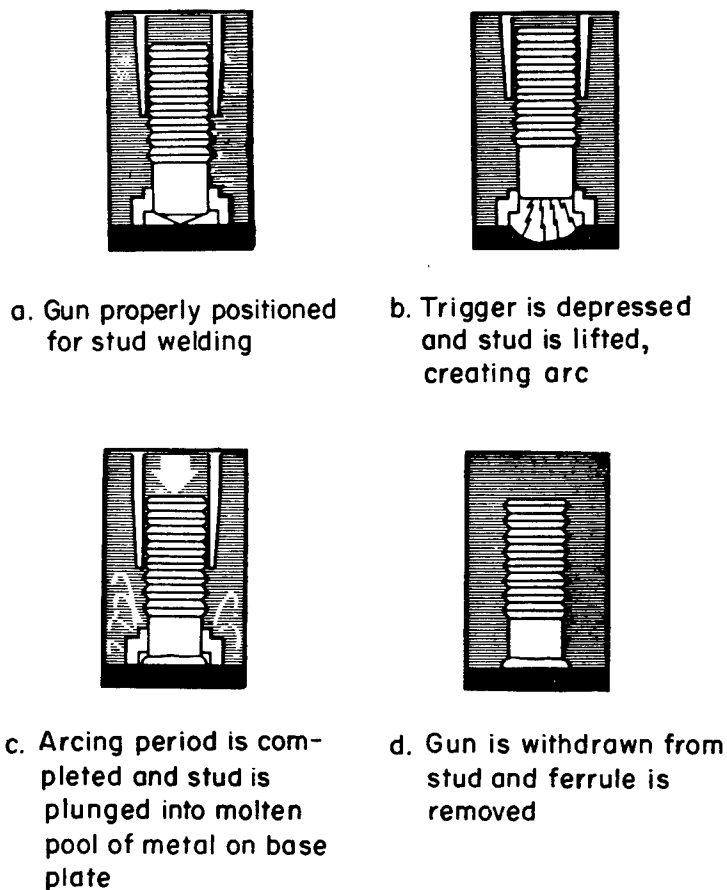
AUTOMATIC WELDING SEQUENCE
